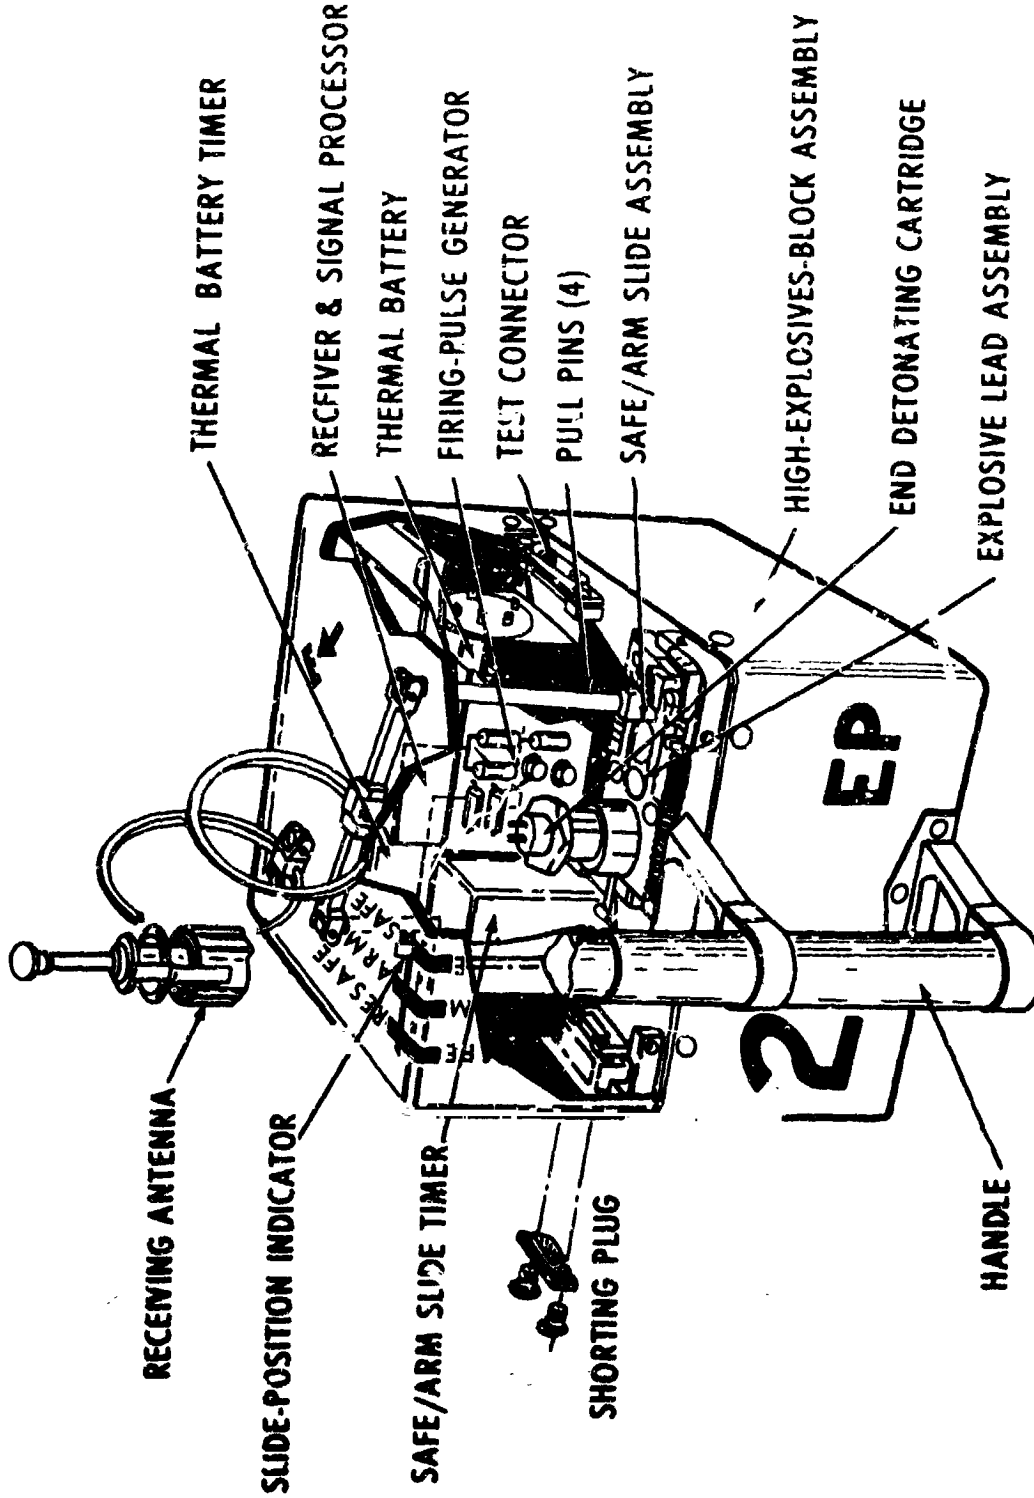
LSPE EXPLOSIVE PACKAGE ASSEMBLY (BENJIX AEROSPACE)
